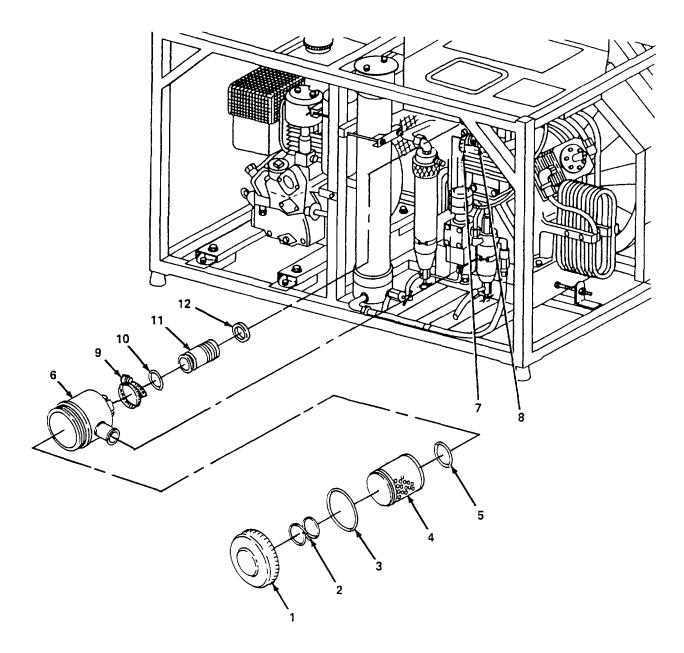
Inlet Filter and Adapter Assembly, Replace.
